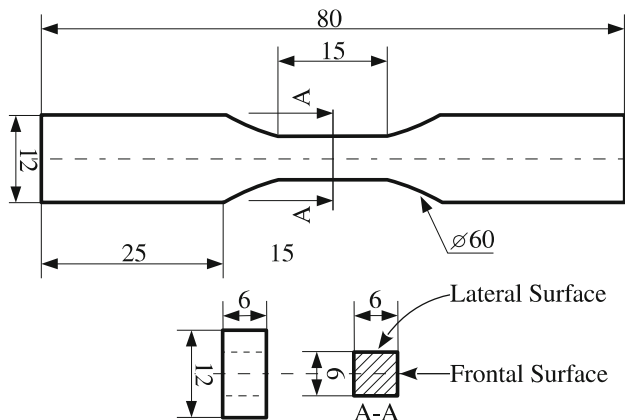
Geometry of fatigue specimens used for surface crack monitoring (dimensions in millimeters).
